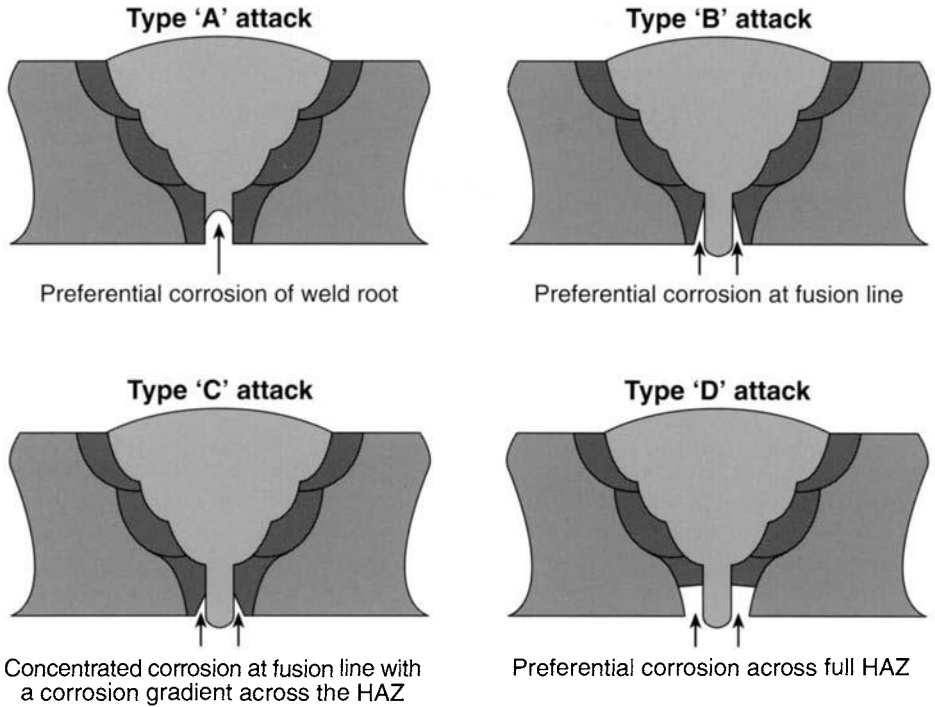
Typical morphologies of preferential weldment corrosion.
